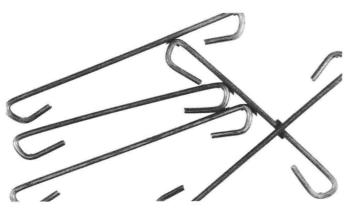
Metal connecting links are used to distribute weight between sinuous springs.
